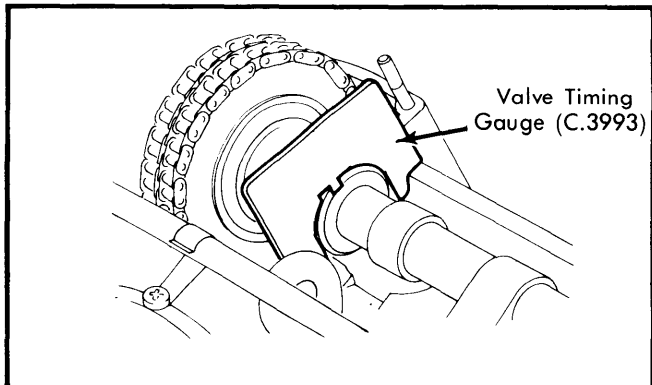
Valve Timing Gauge in Position for Timing Chain Removal or Installation
